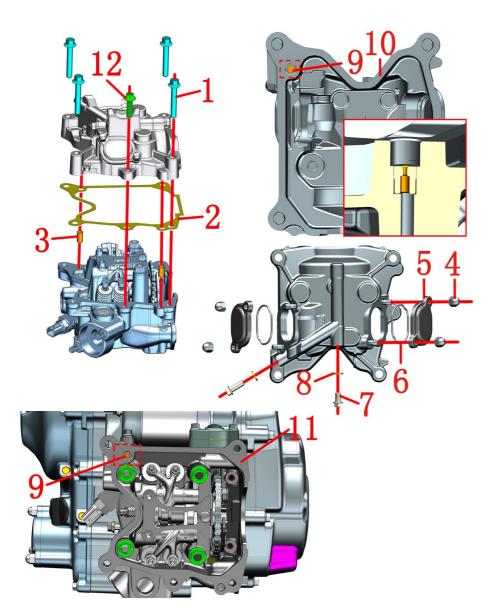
CY	YLINDER HEAD	Cylinder head cover assembly	CHK	40)
